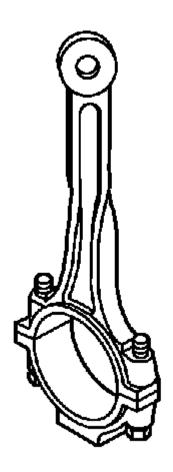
Identifying Twisted Connecting Rod Courtesy of GENERAL MOTORS CORP.
